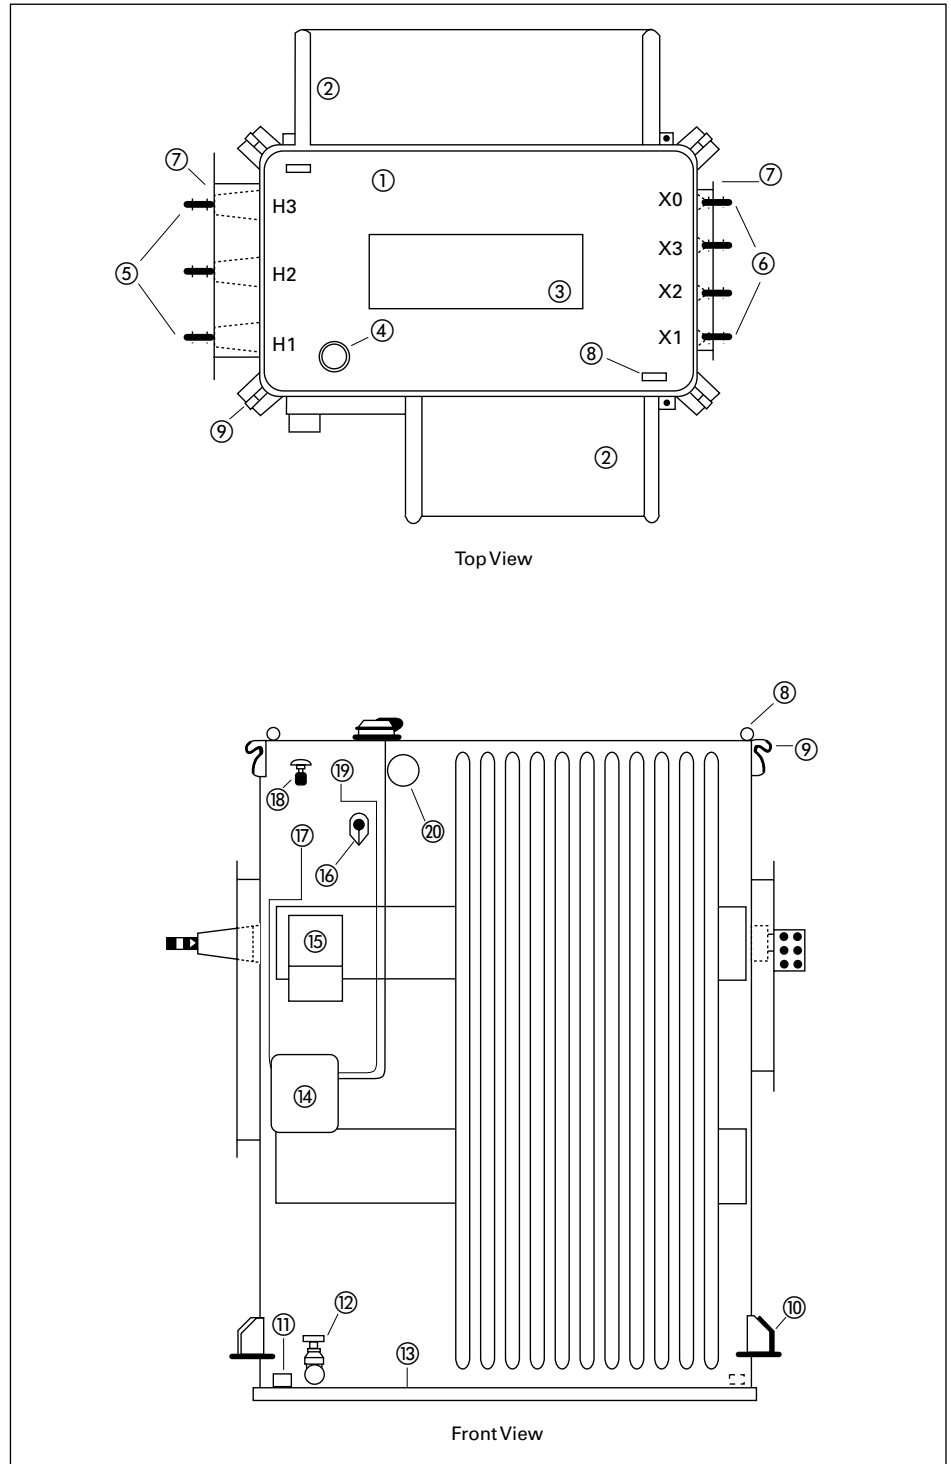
Liquid-Filled Primary Unit Substation Transformer with Wall-Mounted HV and LV Bushings
